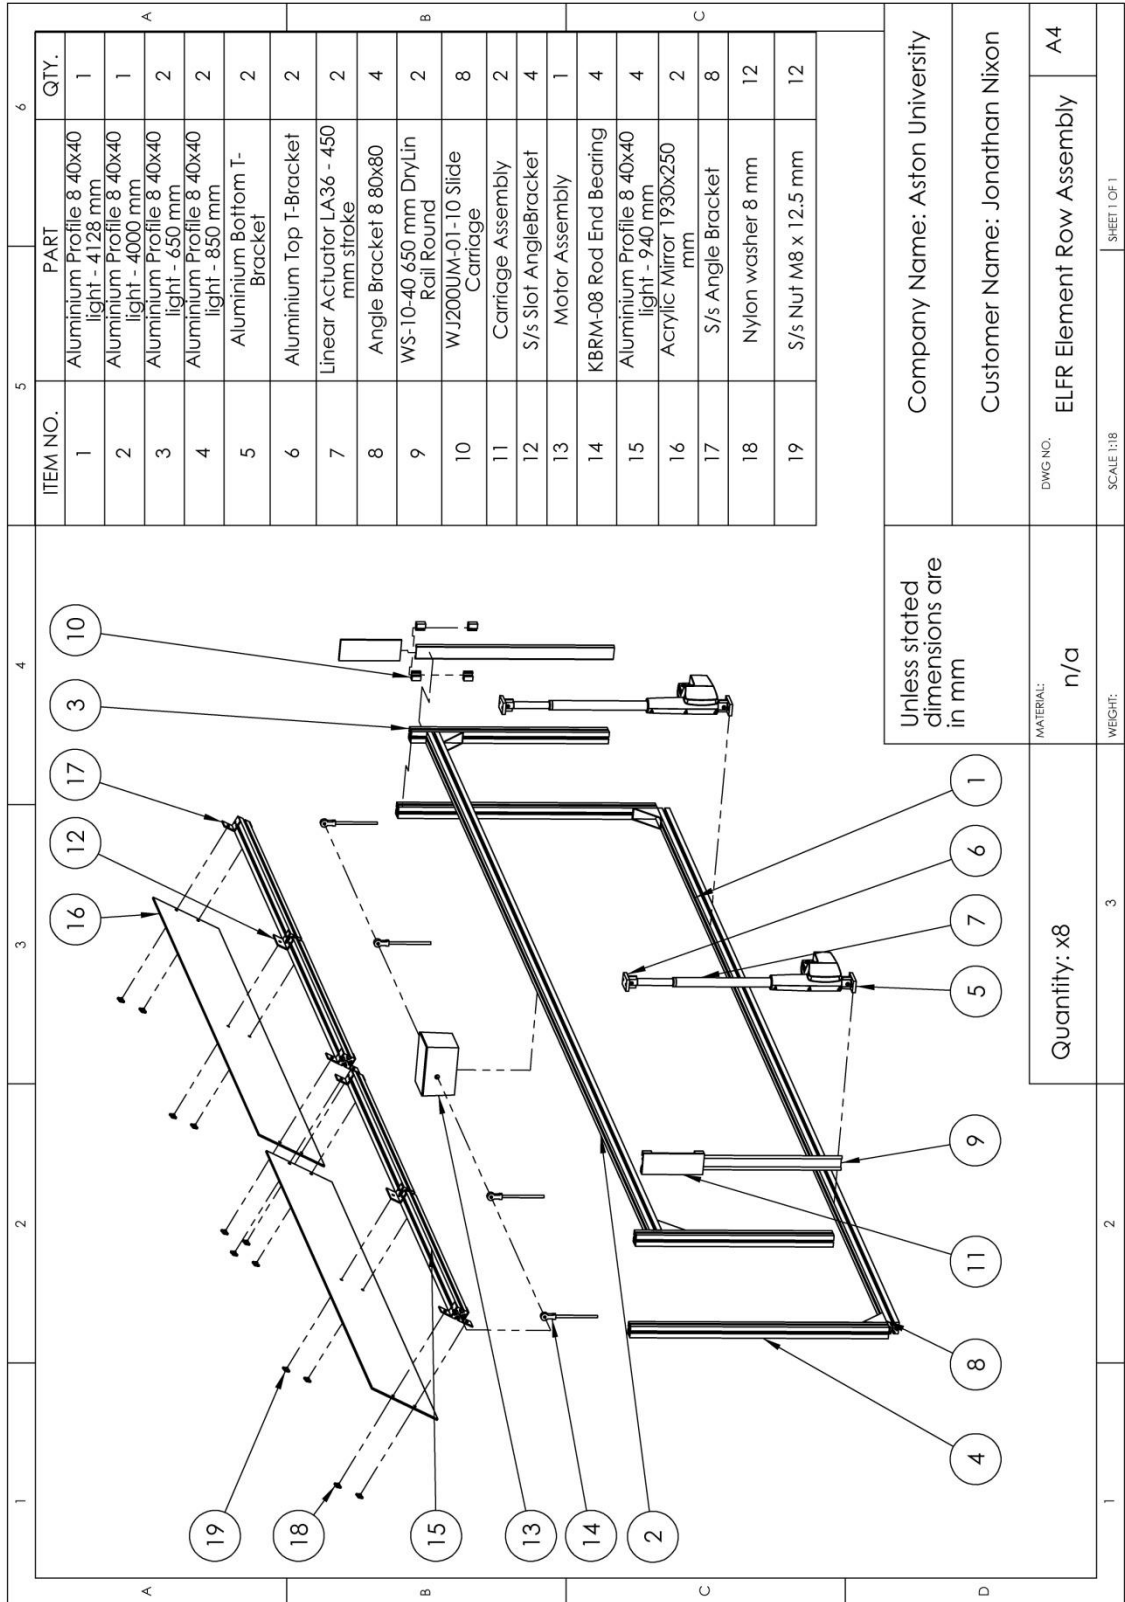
Exploded sub-assembly and BOM for the ELFR element row assembly.
